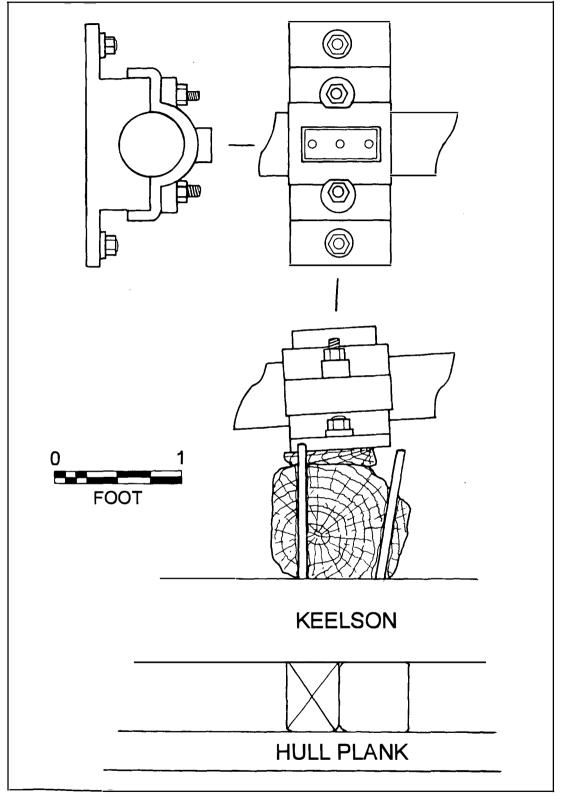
Plan, elevation and end view of forward propeller shaft bearing. Drawing by Jim Bradford.
